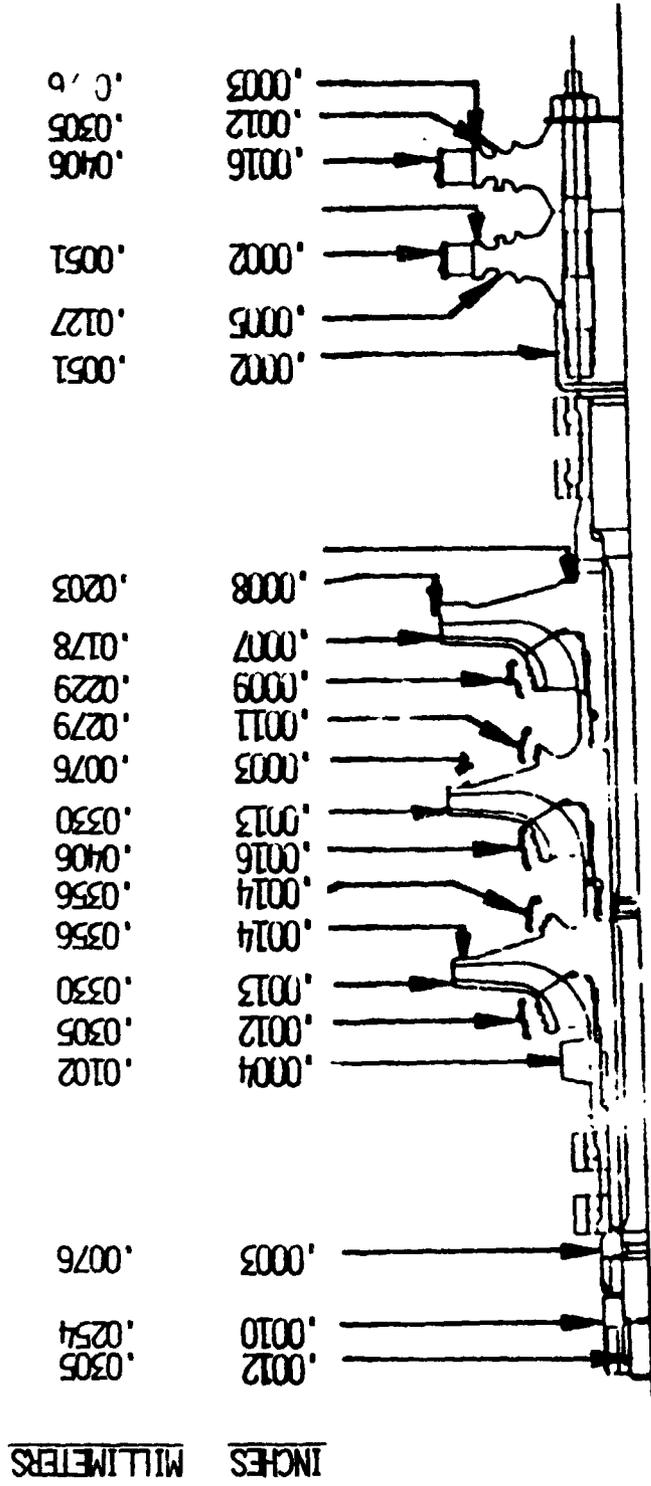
Mark 48-F Turbopump (S/N 02-1) Assembly Runouts
